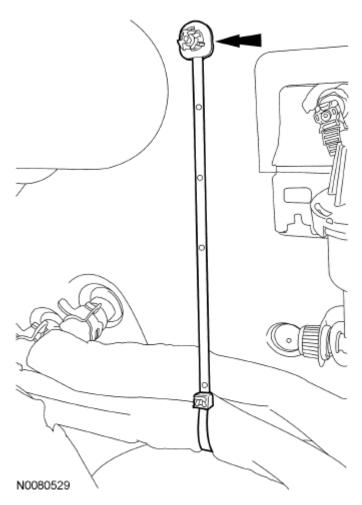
Locating Vacuum Supply Tube Courtesy of FORD MOTOR CO.
